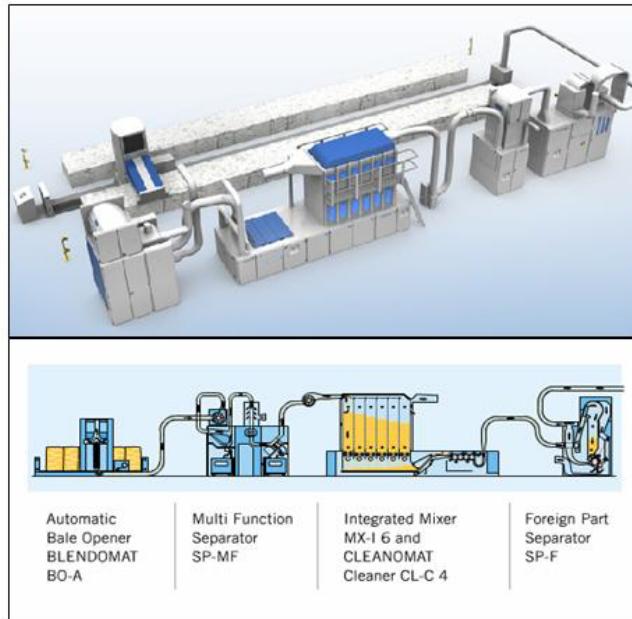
Trutzschler Compact Opening & Cleaning Line.
